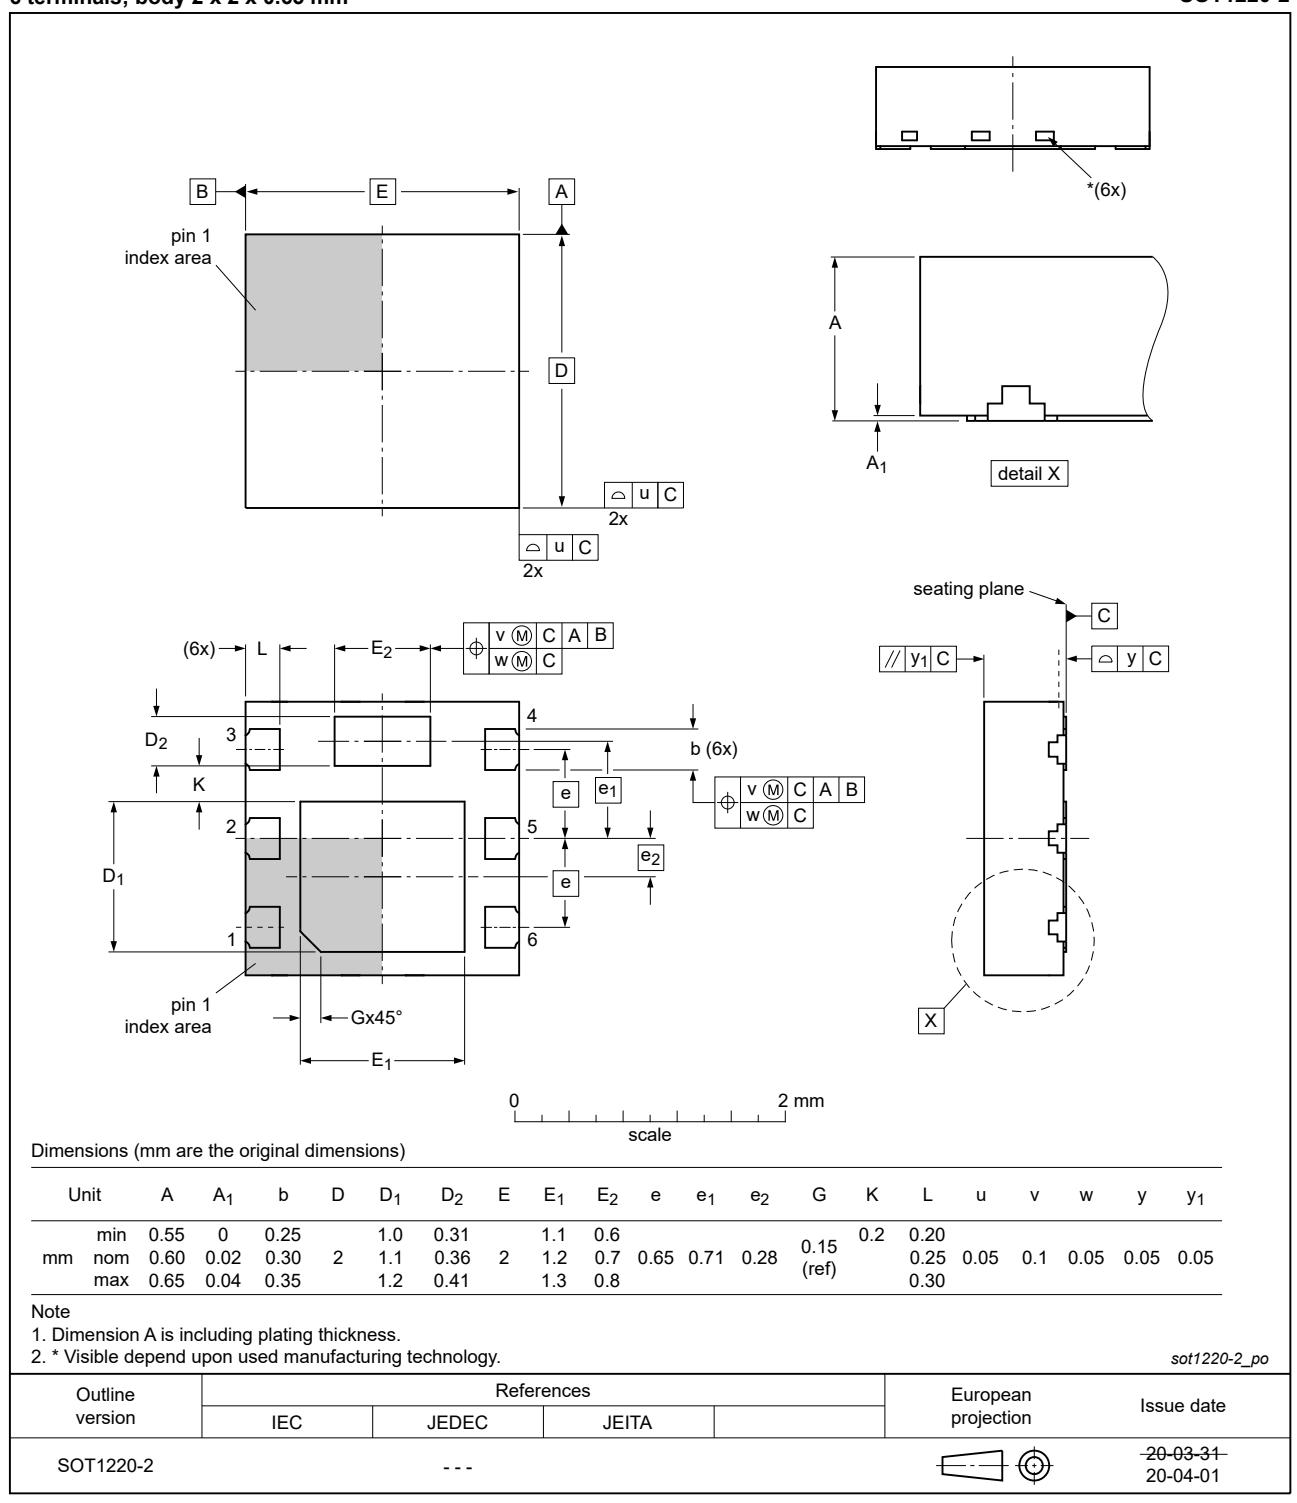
Package outline DFN2020M-6 (SOT1220-2)
